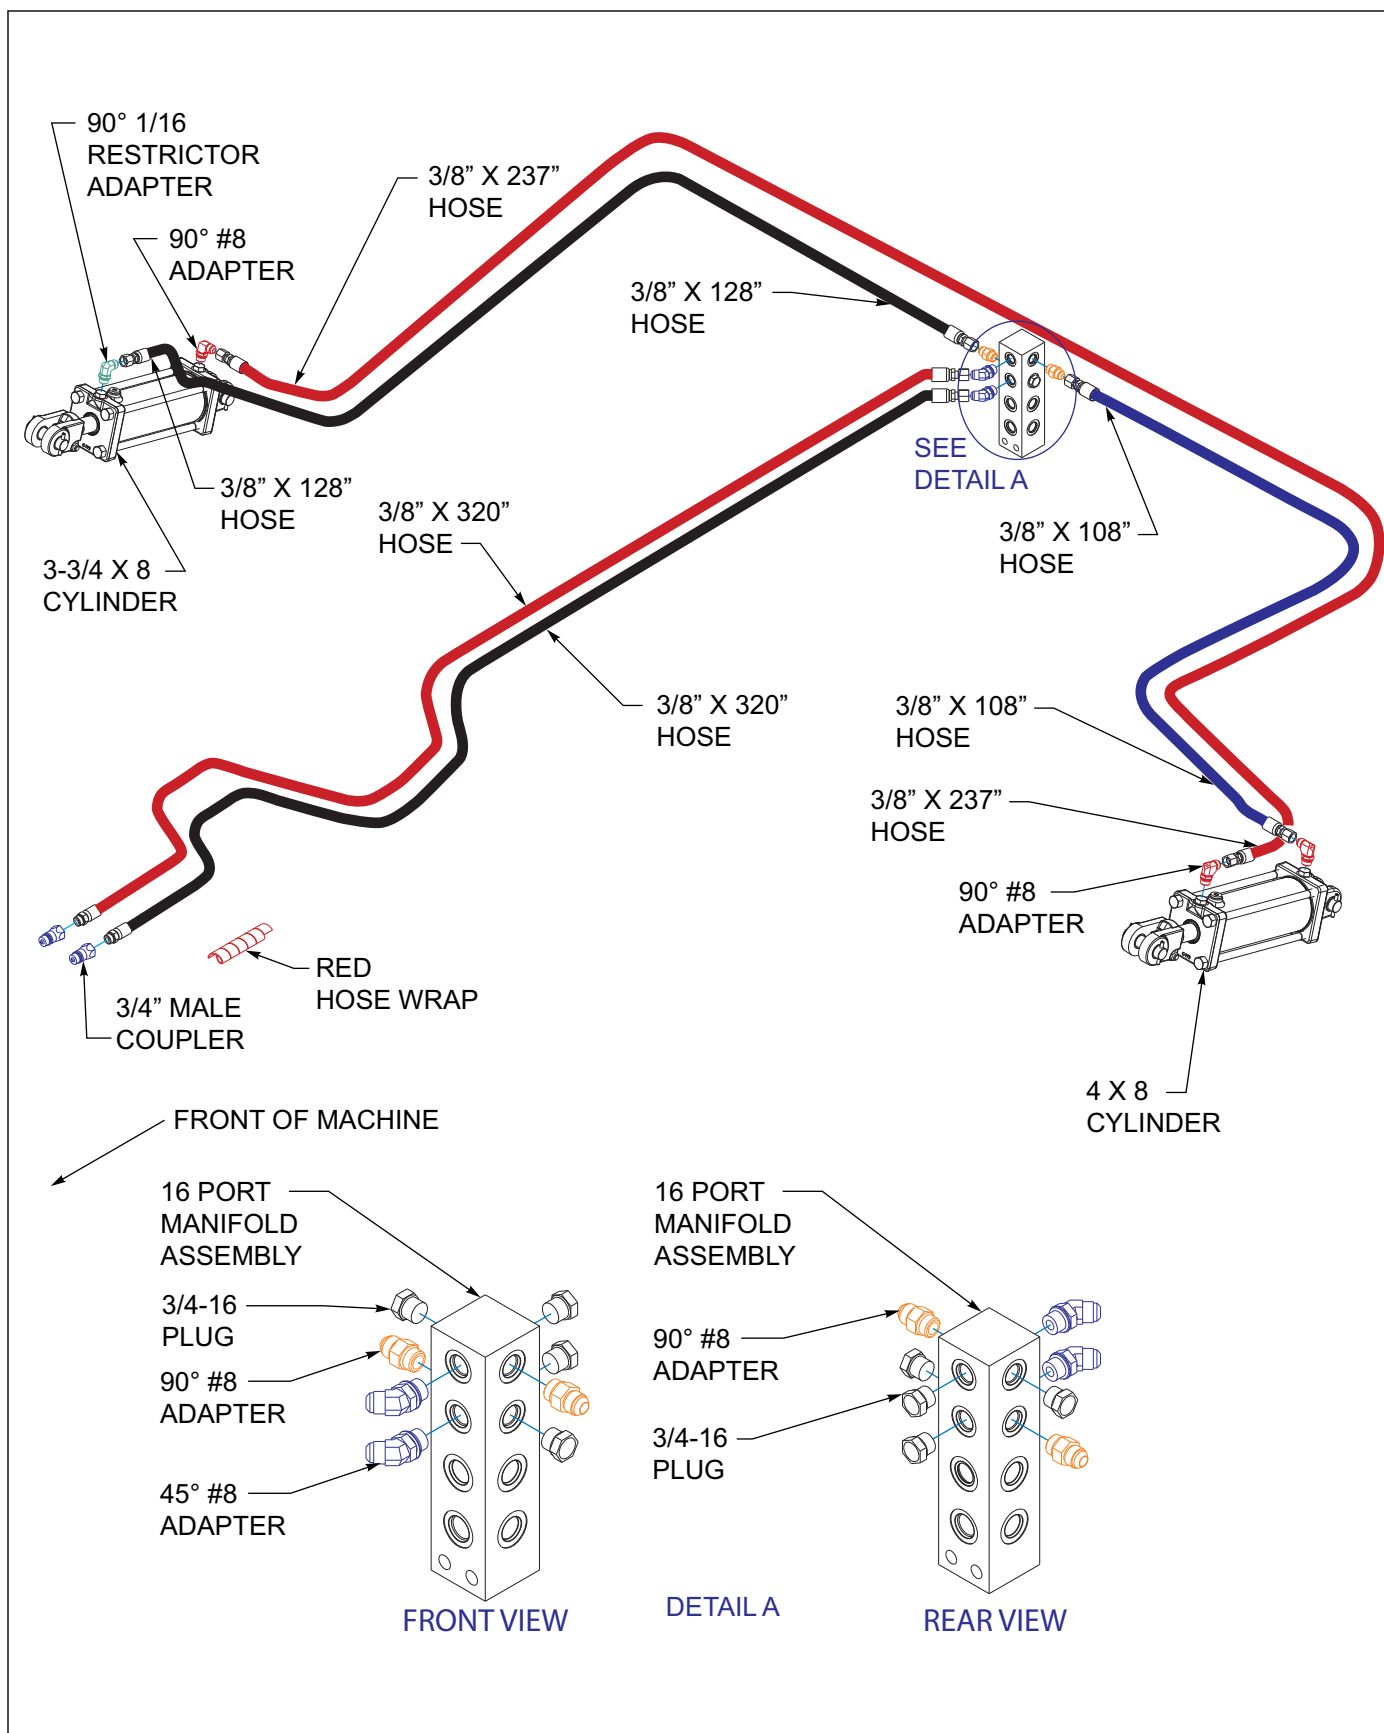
Hydraulic Gang Lift Installation 2411-06
